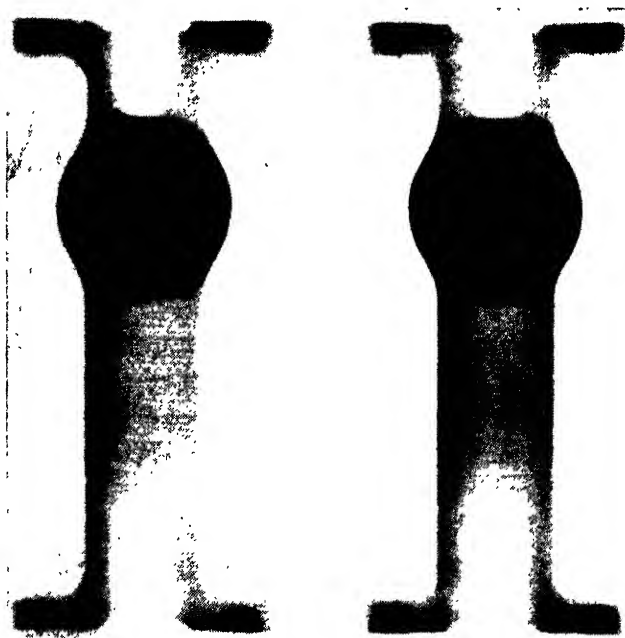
19. Radiograph of two bracket castings. Note defects in casting at left. (*Courtesy Westinghouse Electric Corporation.*)
